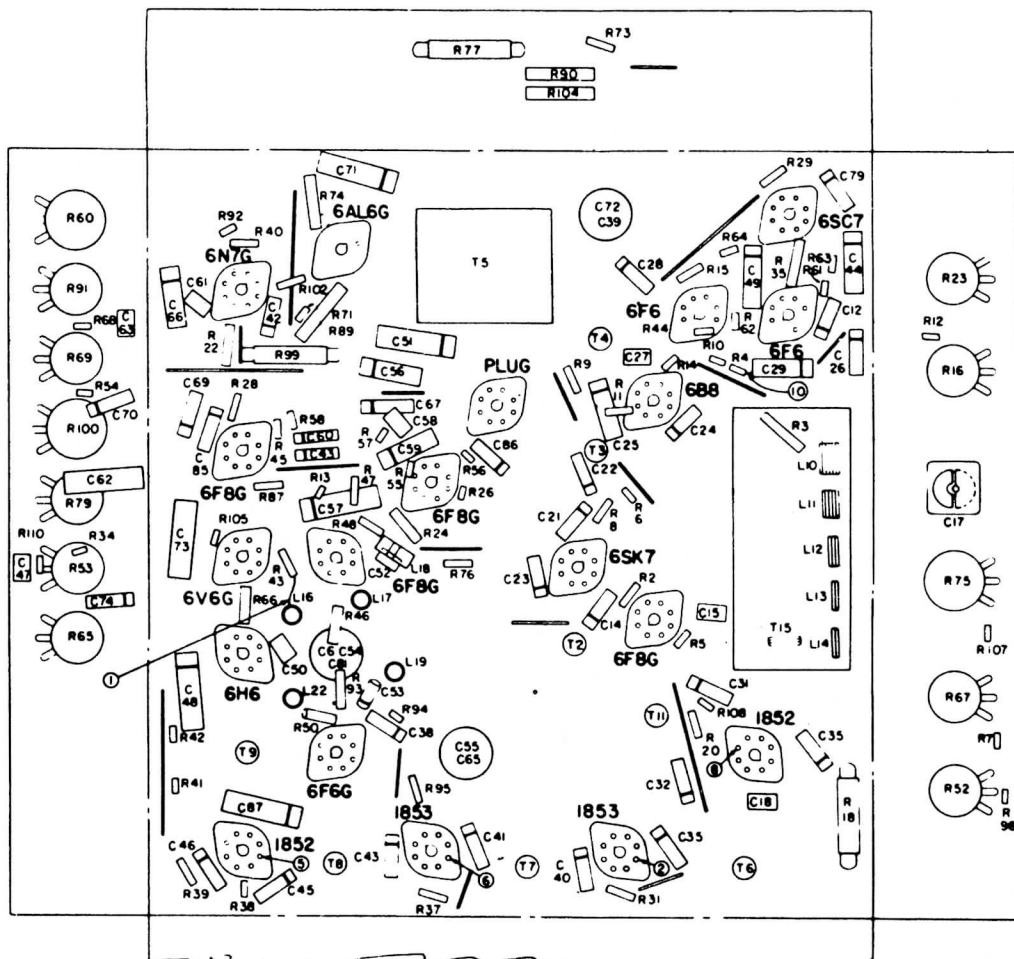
Television Chassis Parts Layout Models HM-225 and HM-226-7A
